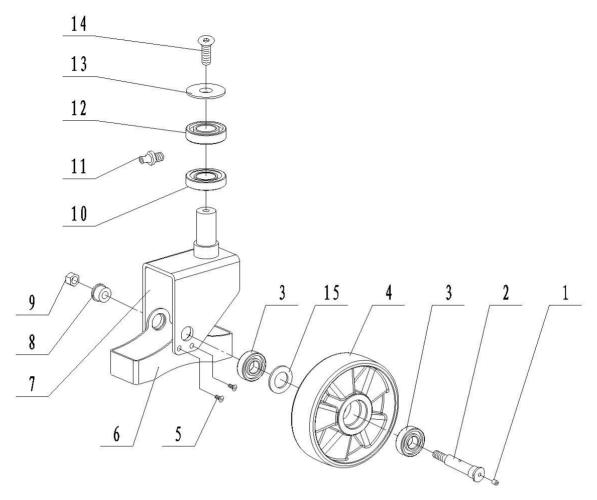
Spare parts list for big wheel assembly/ Lista ricambi per complessivo ruota stabilizzatrice
